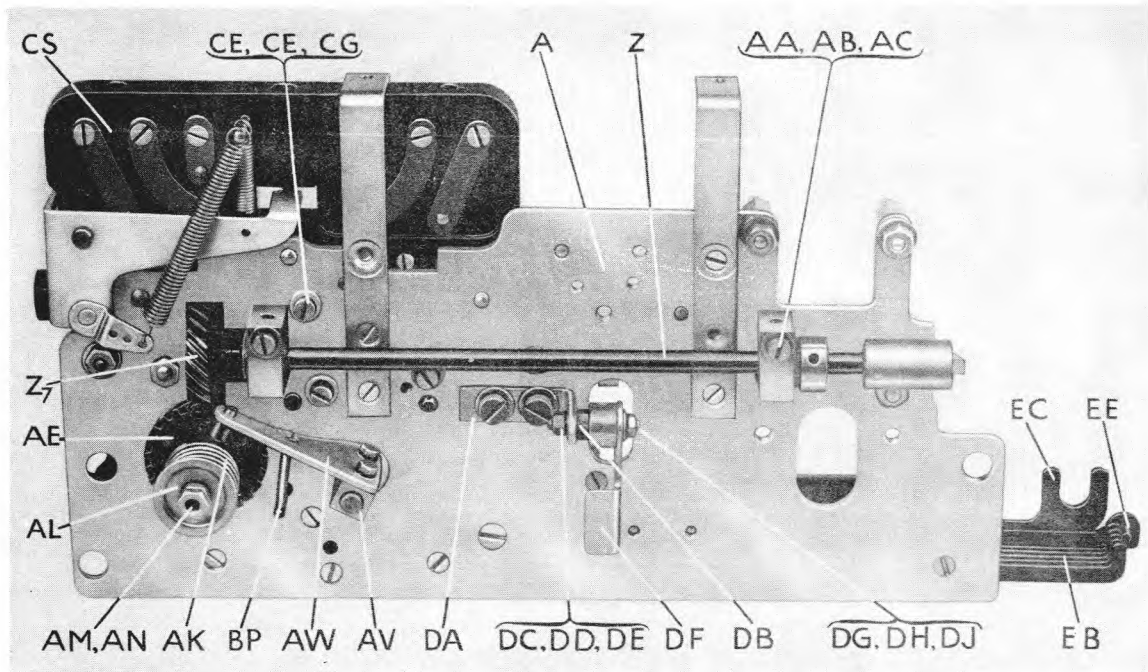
TRANSMITTER UNIT S3744B (REAR VIEW)
